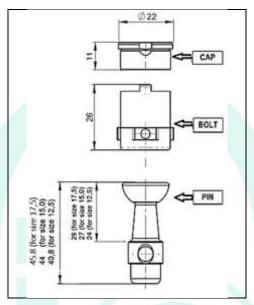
MUTARS® HD Coupling M-O-M - Dimensions (in mm)
